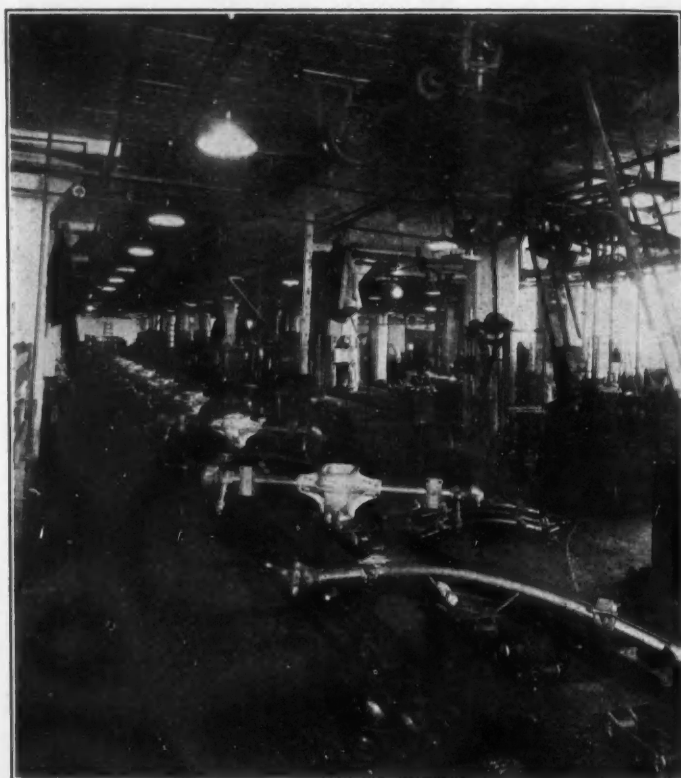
MAIN LINE OF AXLE-ASSEMBLY CONVEYOR
